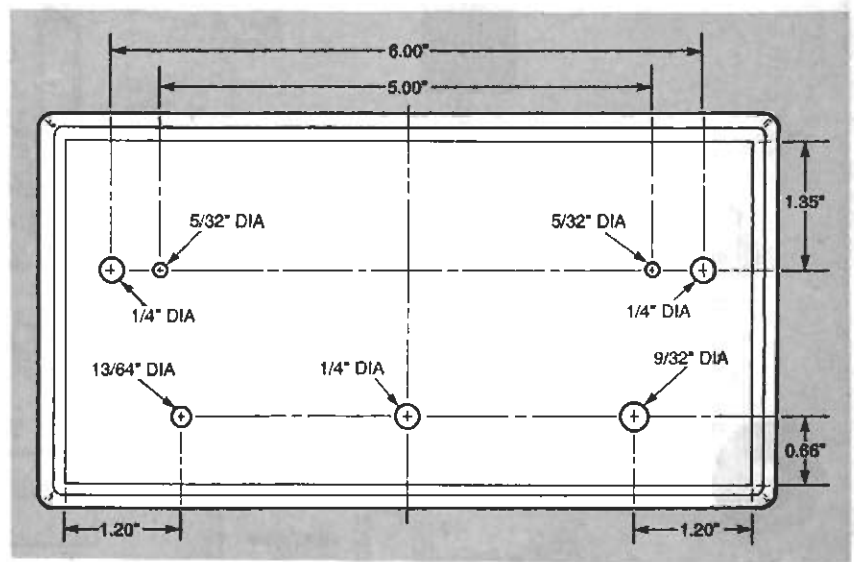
DRILLING GUIDE for the levitator enclosure.
